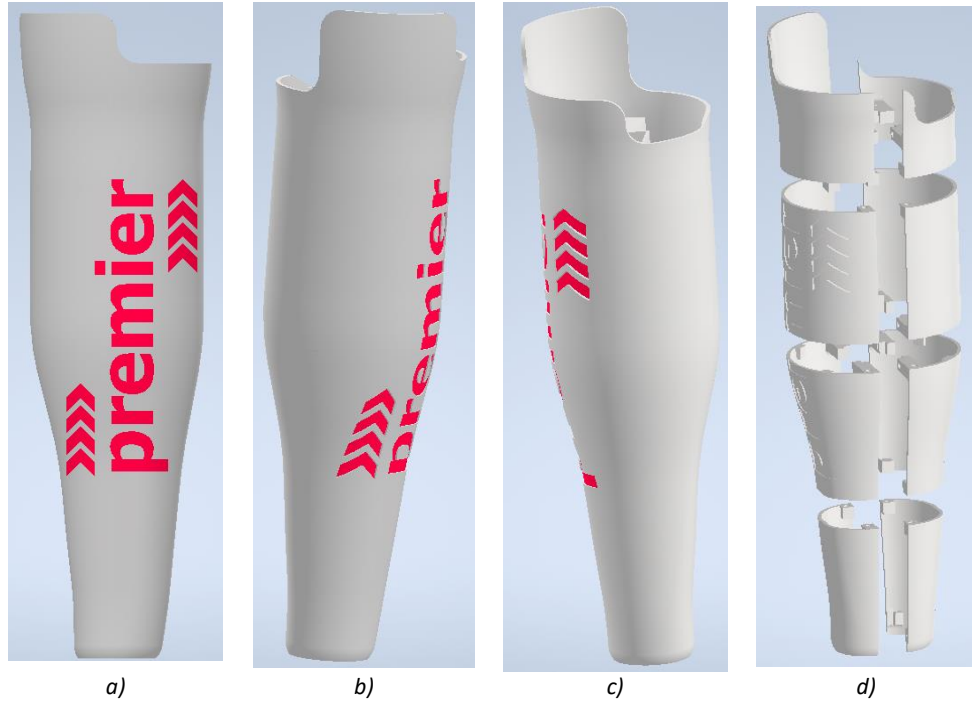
Shank Cover – a) Left Side View; b) Front Left Perspective; c) Back Left Perspective; d) Exploded View
